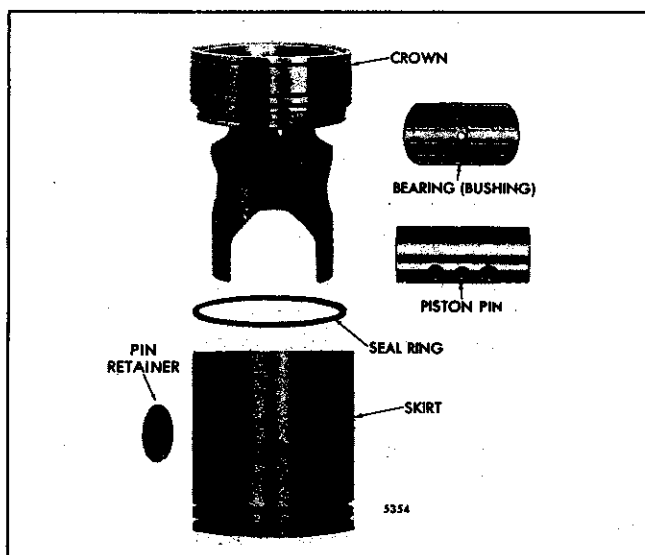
Cross-Head Piston and Connecting Rod Components
